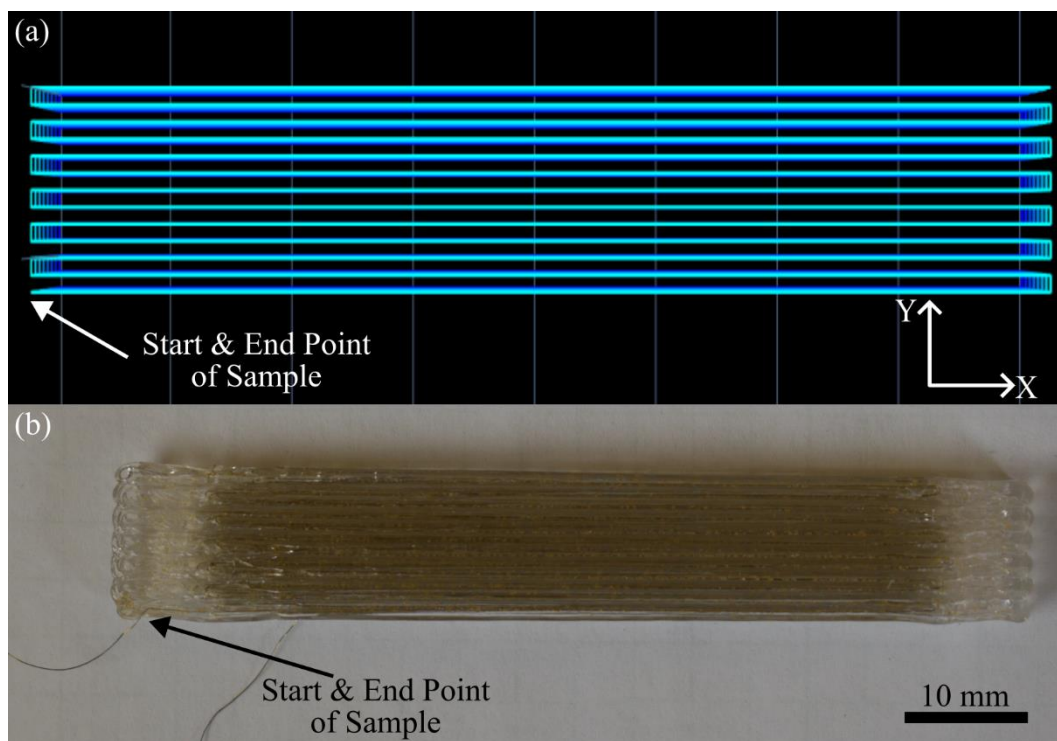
Printed continuous wire polymer composites: (a) display of toolpath from FullControl GCode and (b) printed unprocessed sample
